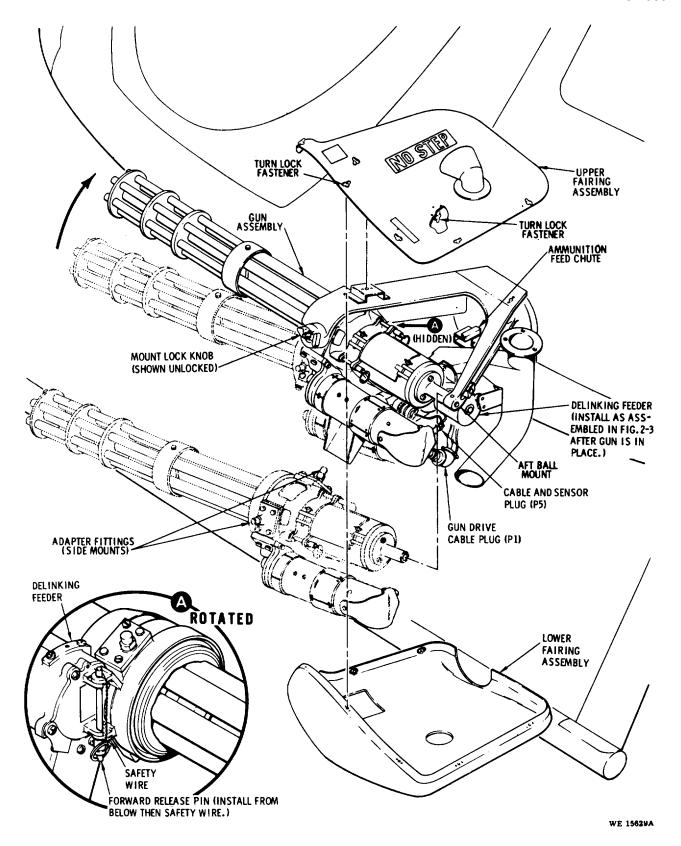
Installation/removal of gun assembly and fairing assembly.
